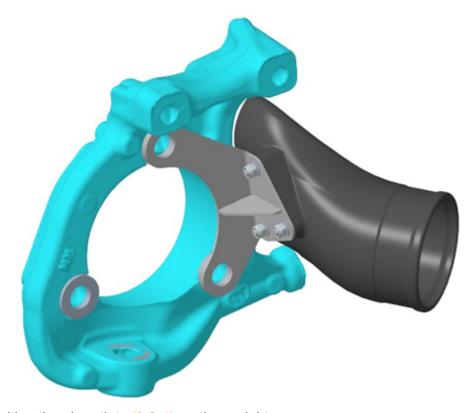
Bolting the air-outlets (3 & 4) on the upright
